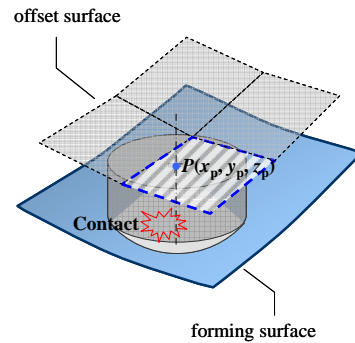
A patch in which center of a punch is aligned under contacting with forming surface
